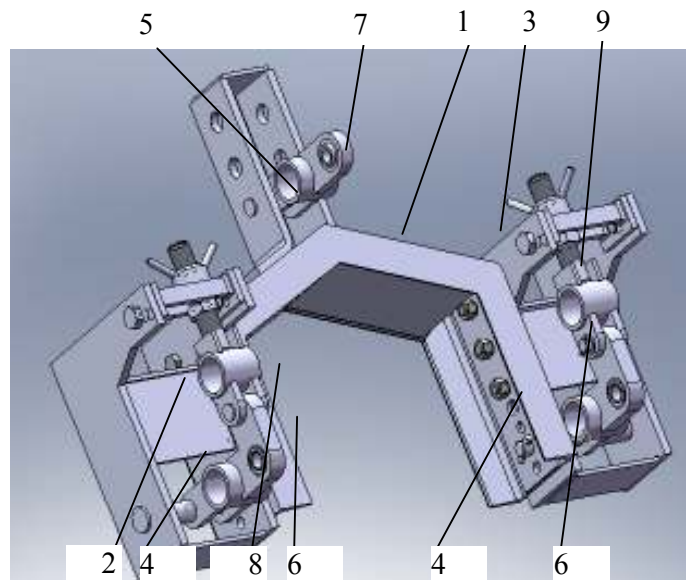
Intermediate frame with tensometric rings for forces measurement of machine traction force:
